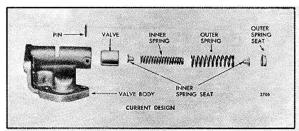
Oil Pressure Relief Valve Details and Relative Location of Parts (6V or 8V Bearing Cap Mounted Oil Pump and 12V Engines)
